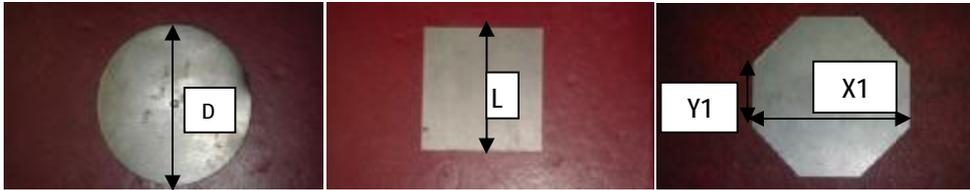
shape of used blanks, where $D=80\text{mm}$ (diameter of circular blank), $L=70\text{mm}$ (side length of square blank), $X1=77\text{mm}$, $Y1= 32\text{mm}$ (dimensions of octagonal blank).
